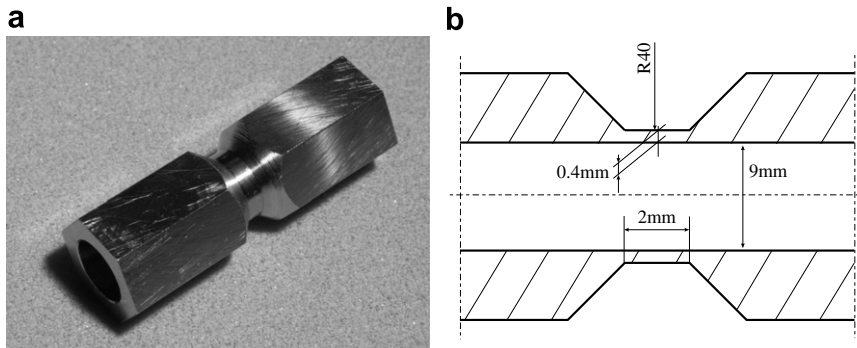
Geometry of the torsion specimen (a) photograph of the specimen; (b) plan of the useful part.
